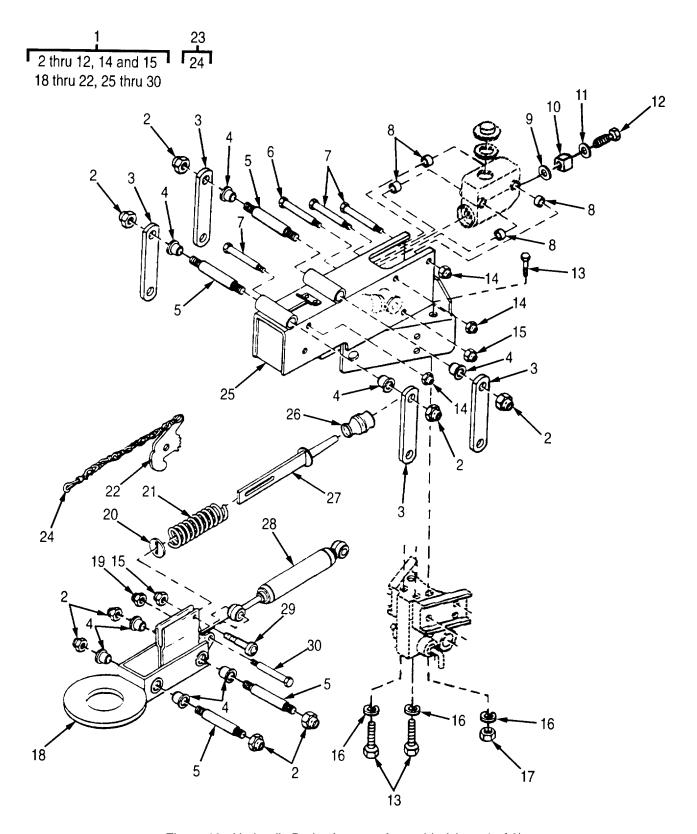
Hydraulic Brake Actuator Assembly (sheet 1 of 2)
